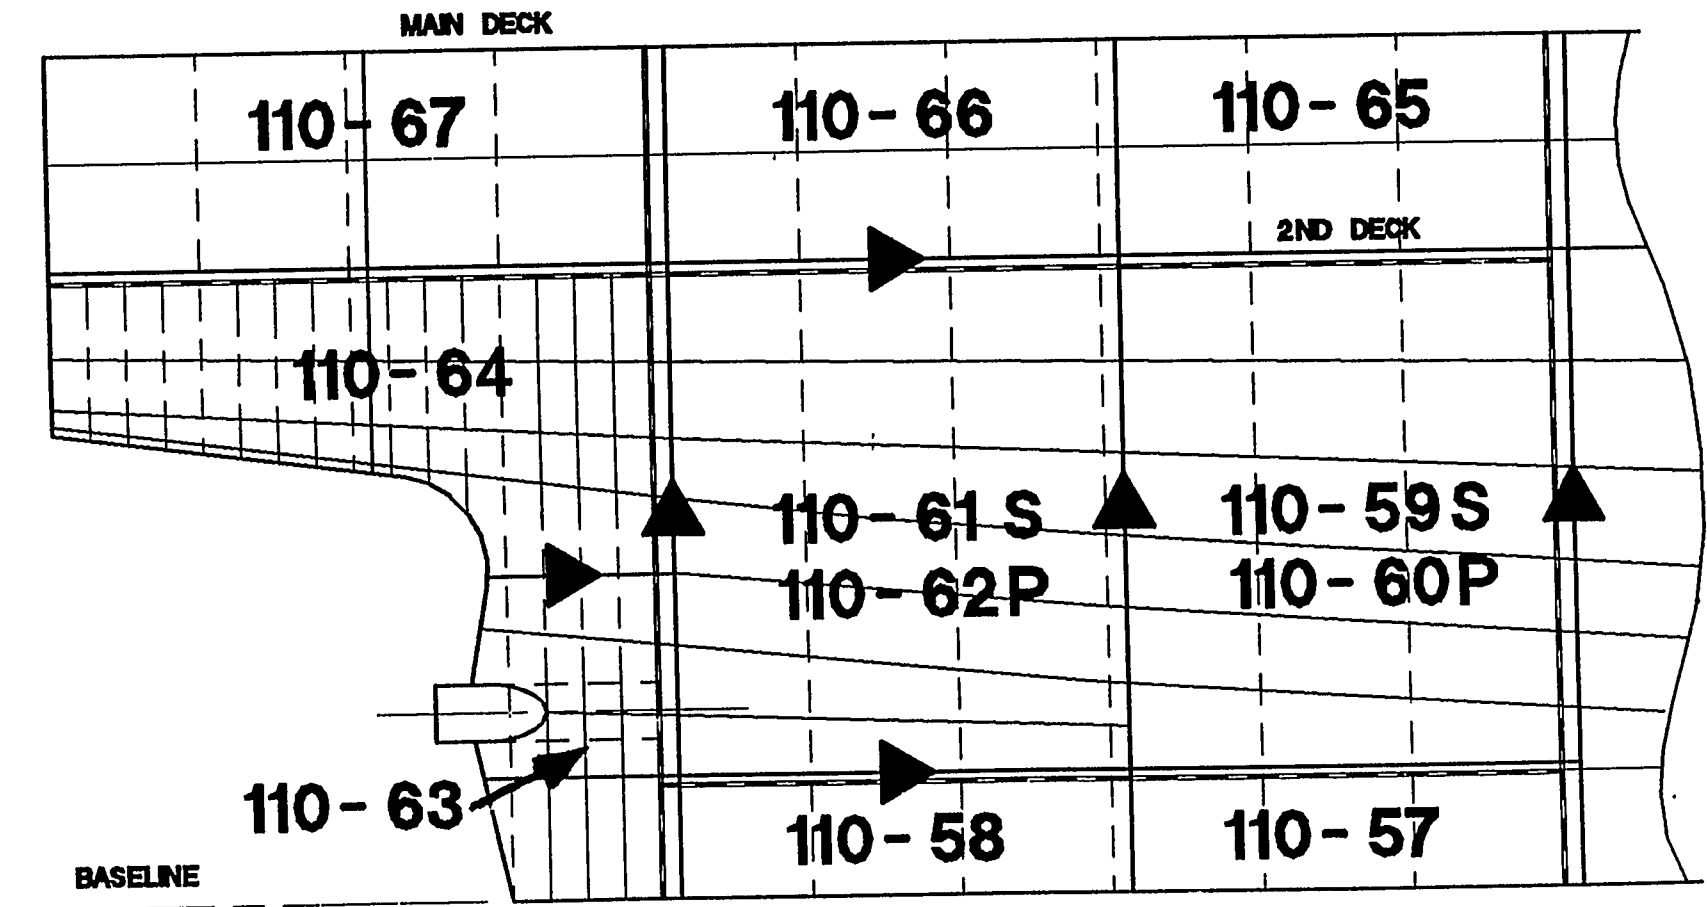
BLOCK DEFINITION DRAWING
